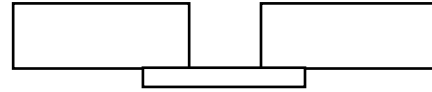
PLATE EDGE PREPARATION FOR BUTT WELDS
